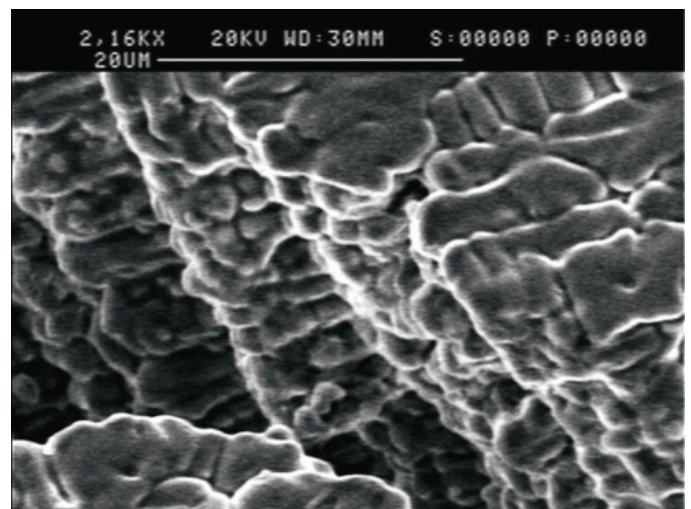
SEM. Hot cracks in the weld of X10CrNiCuNb18-9-3 steel
